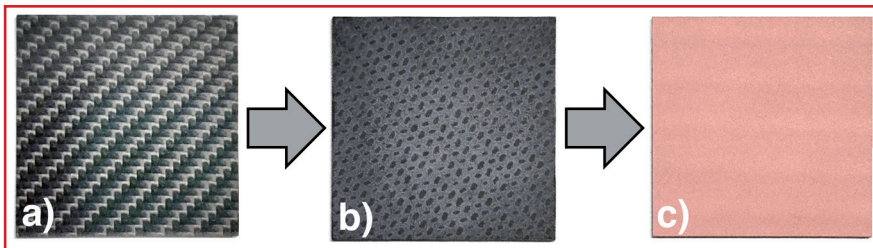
Surface view: a) initial state, b) after grit blasting, c) with Cu coating
